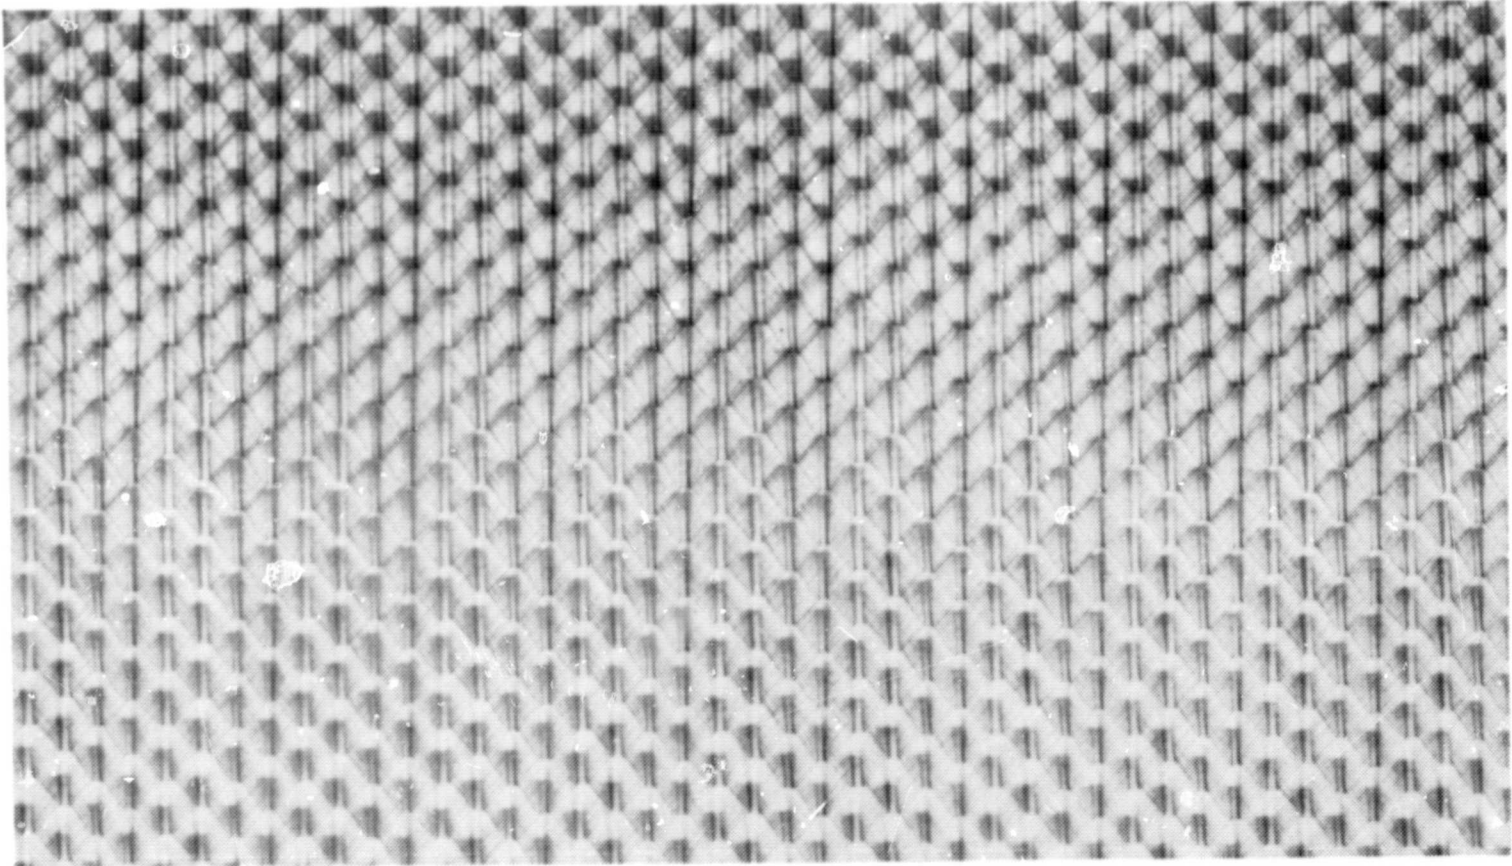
Typical x-ray view of honeycomb panel L9000002-1007 - top surface.
